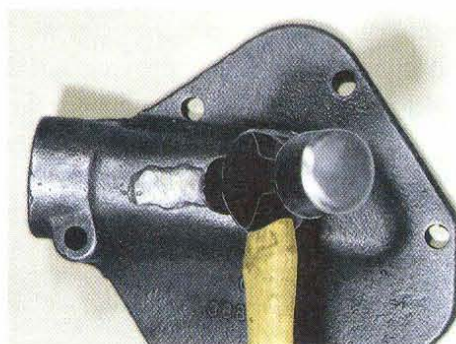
Peening helps to relieve stresses when welding cast iron.
